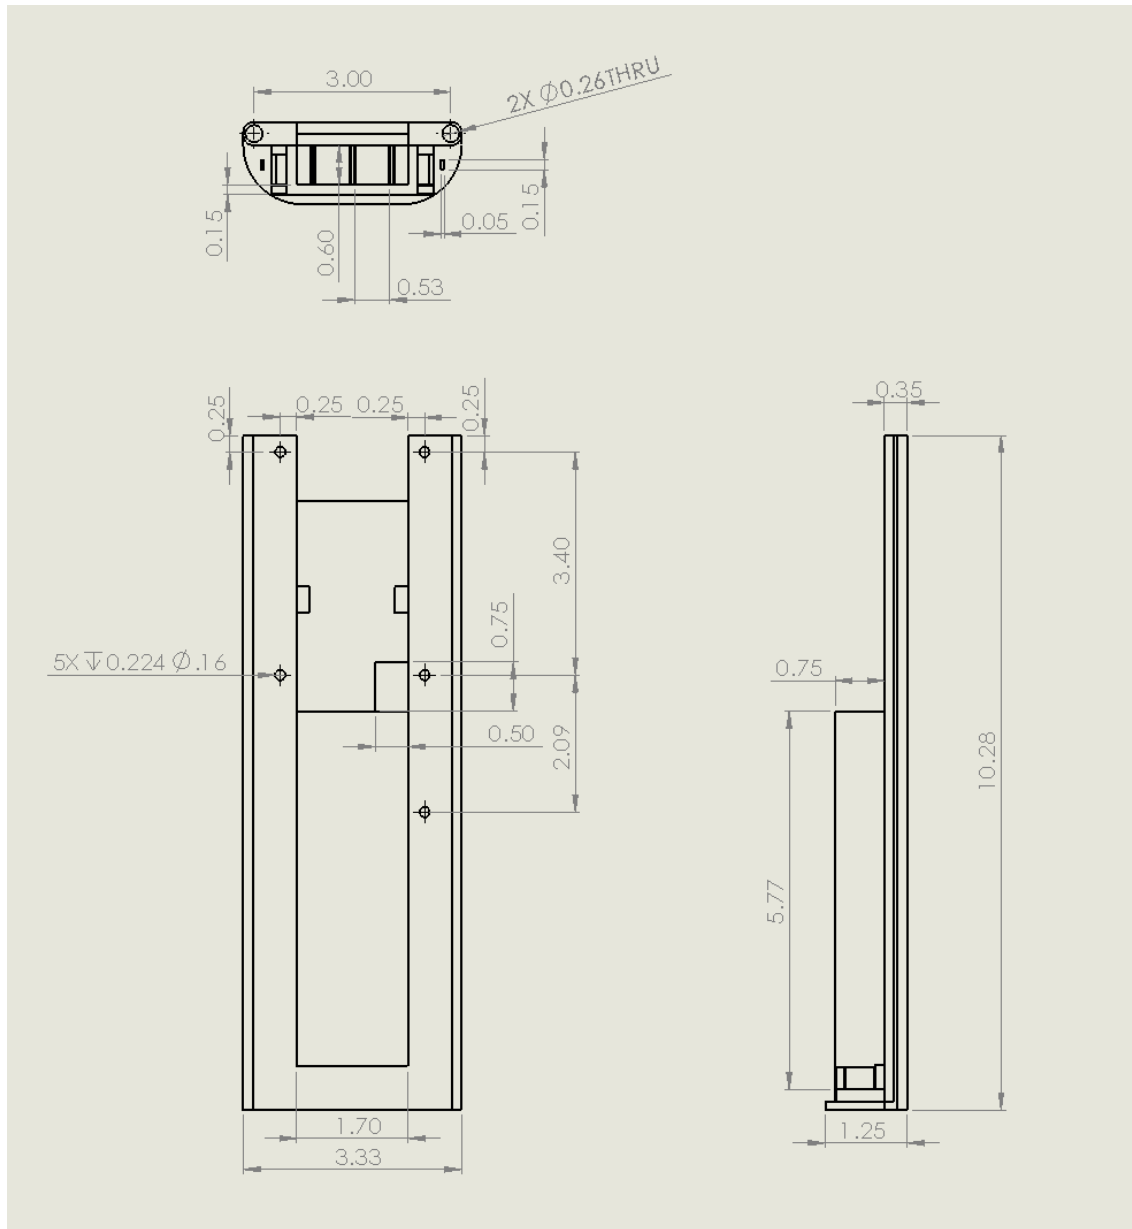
Electronics sled drawing with major dimensions annotated.
